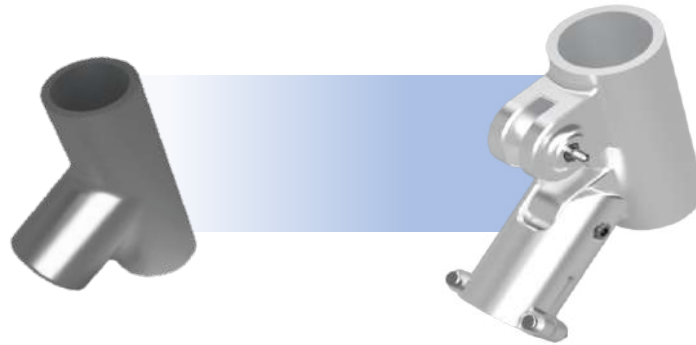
HEAD TUBE JOINT DEVELOPMENT
